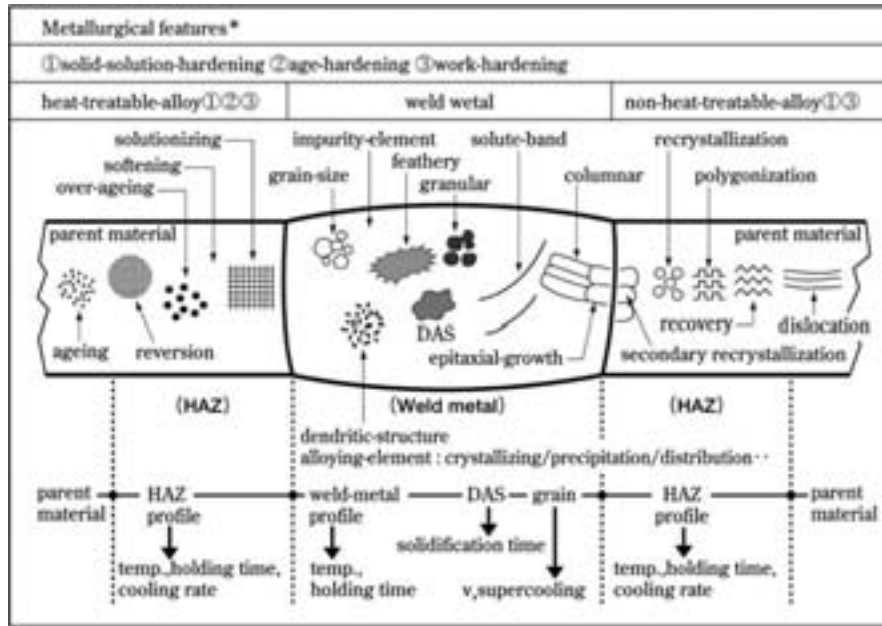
Microstructure morphology of butt joint by inert gas arc welding for aluminum alloys.¹⁾
